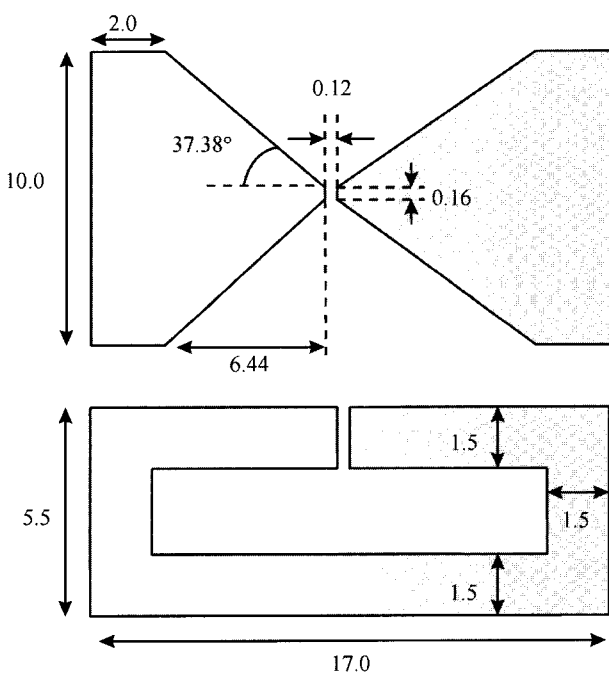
Shape and dimensions of the planar-type head used in this work. The dimensions are given in mm.
